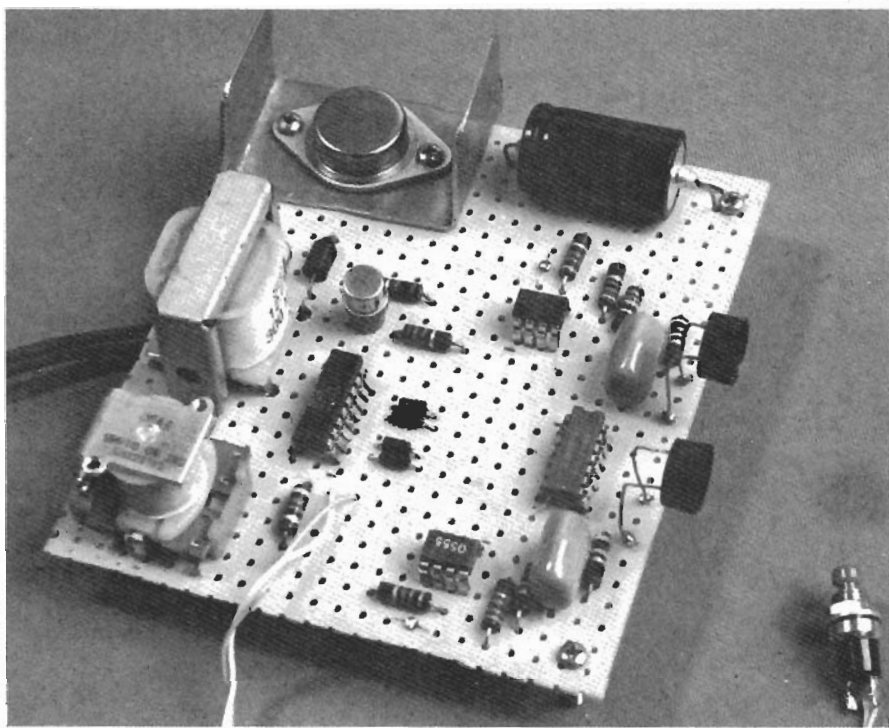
The prototype of the photoelectric sensor was assembled entirely on perforated board. LDR's are on right side of board. CLEAR switch is connected by twisted leads.
